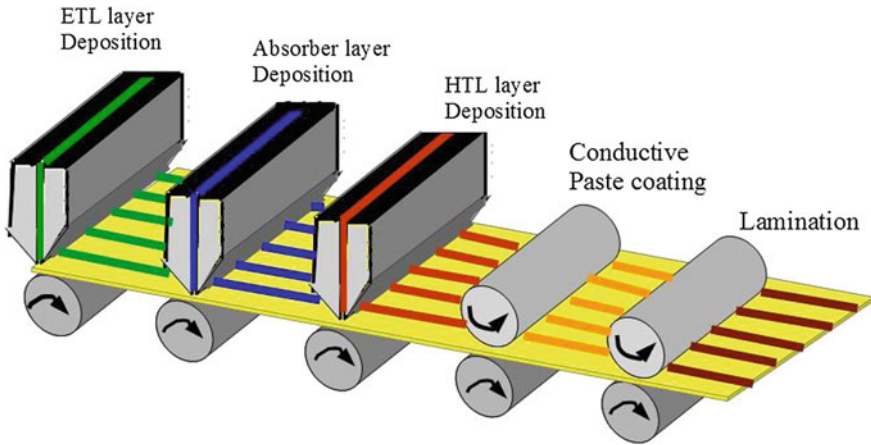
PSC solar cell production using roll-to-roll printing techniques [42]
